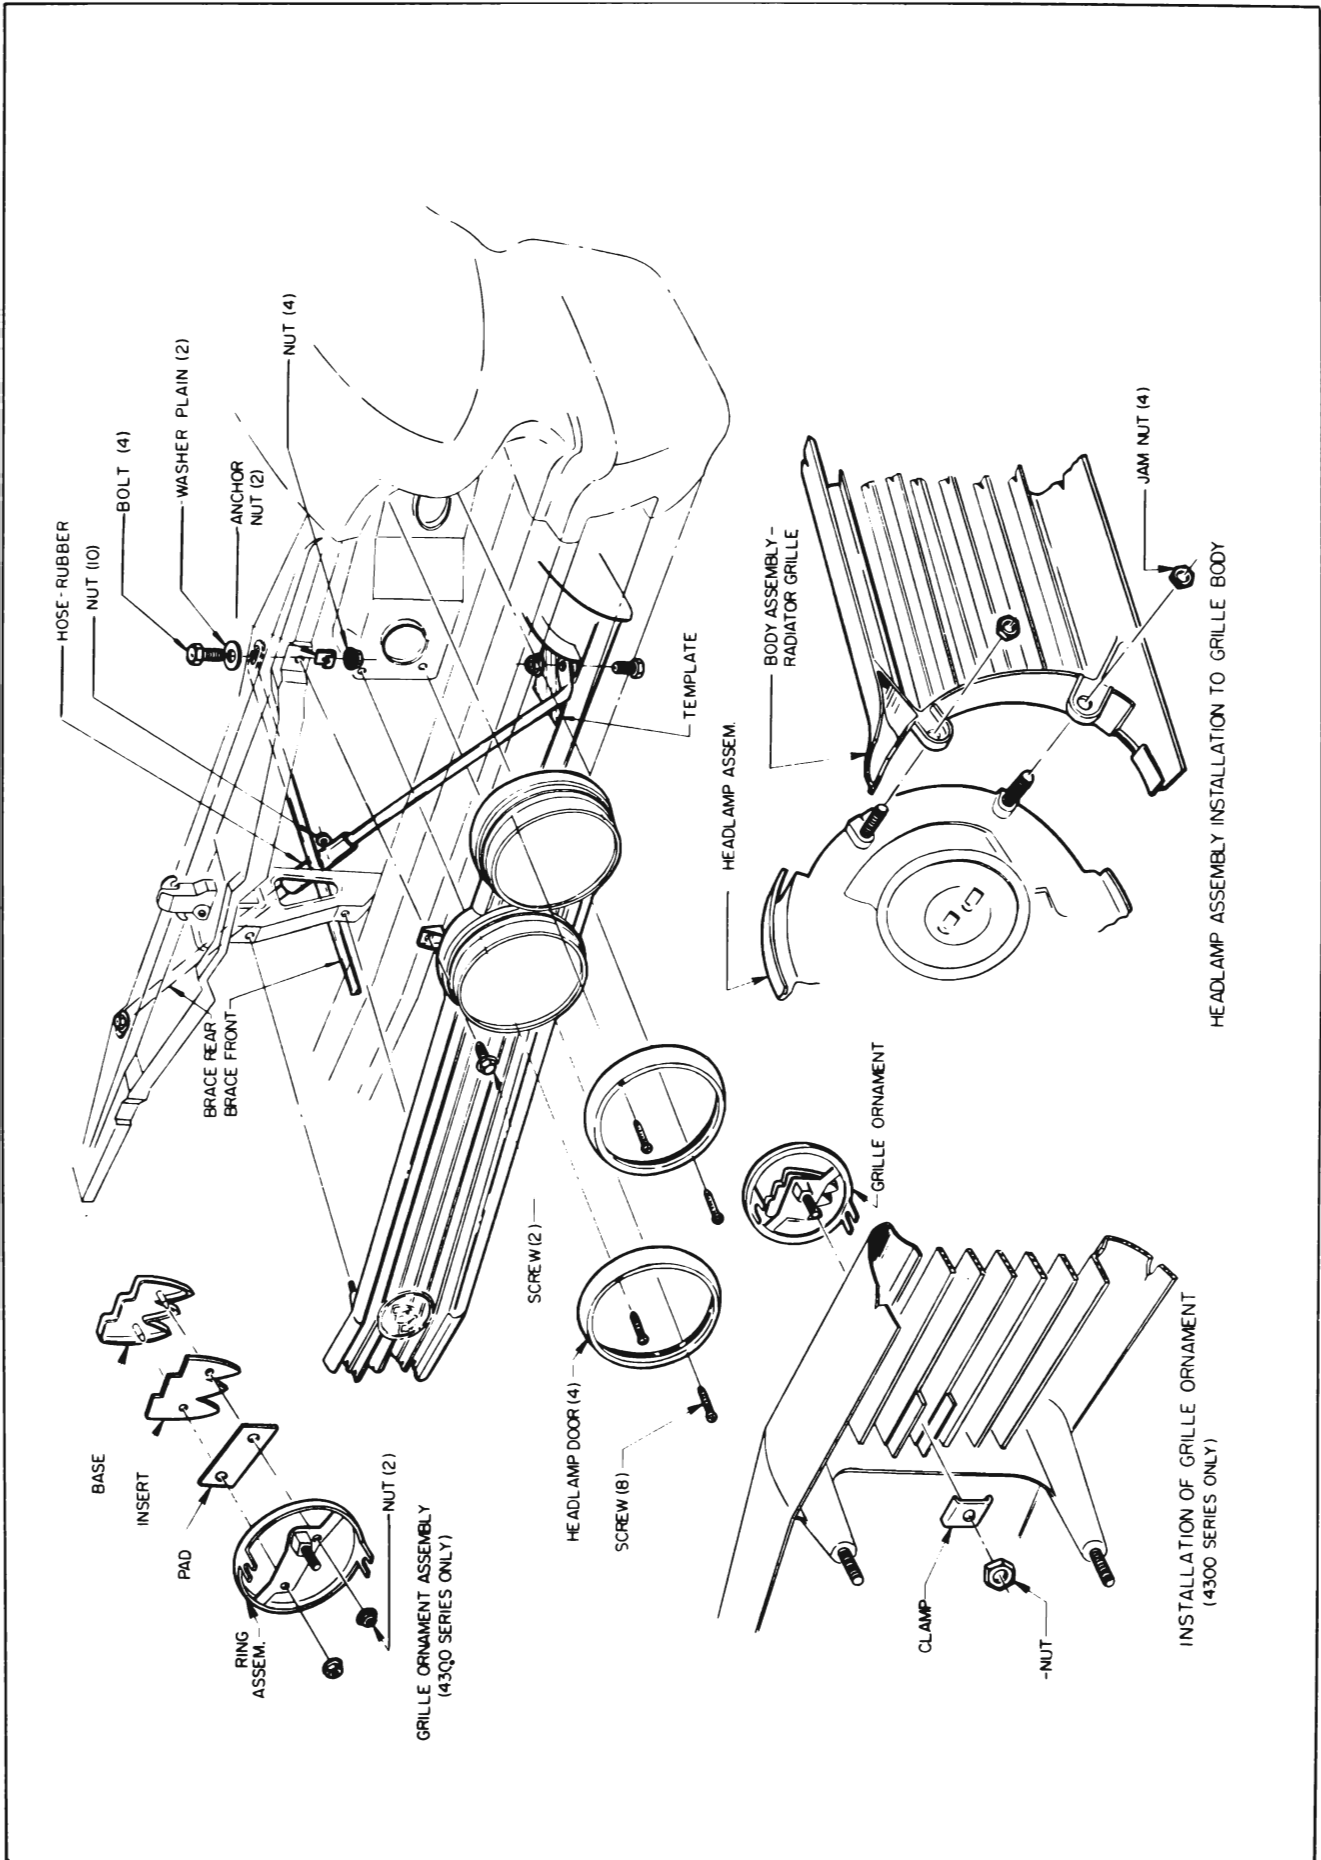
Radiator Grille, Headlamp and Front End Installation
